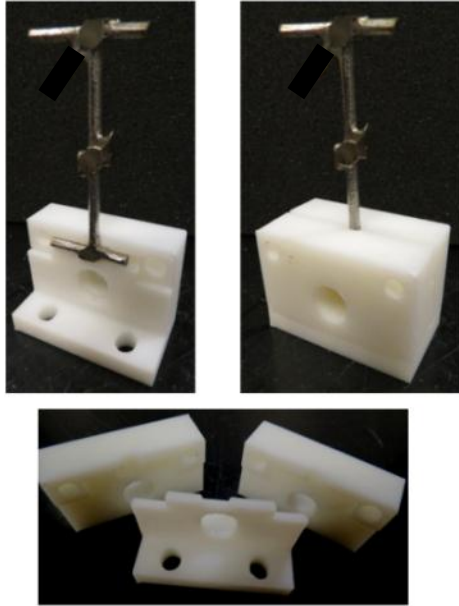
Rapid Prototype of Transverse Specimen Fixture
